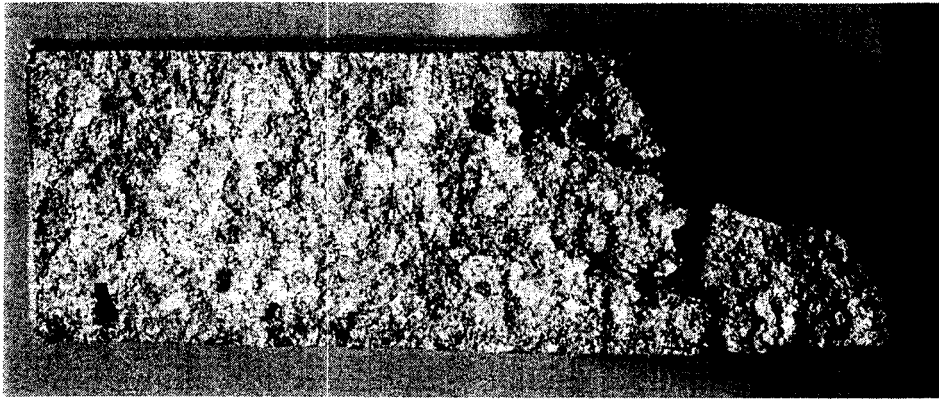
Large Casting Defect in Transformer Base of Specimen C-6.
